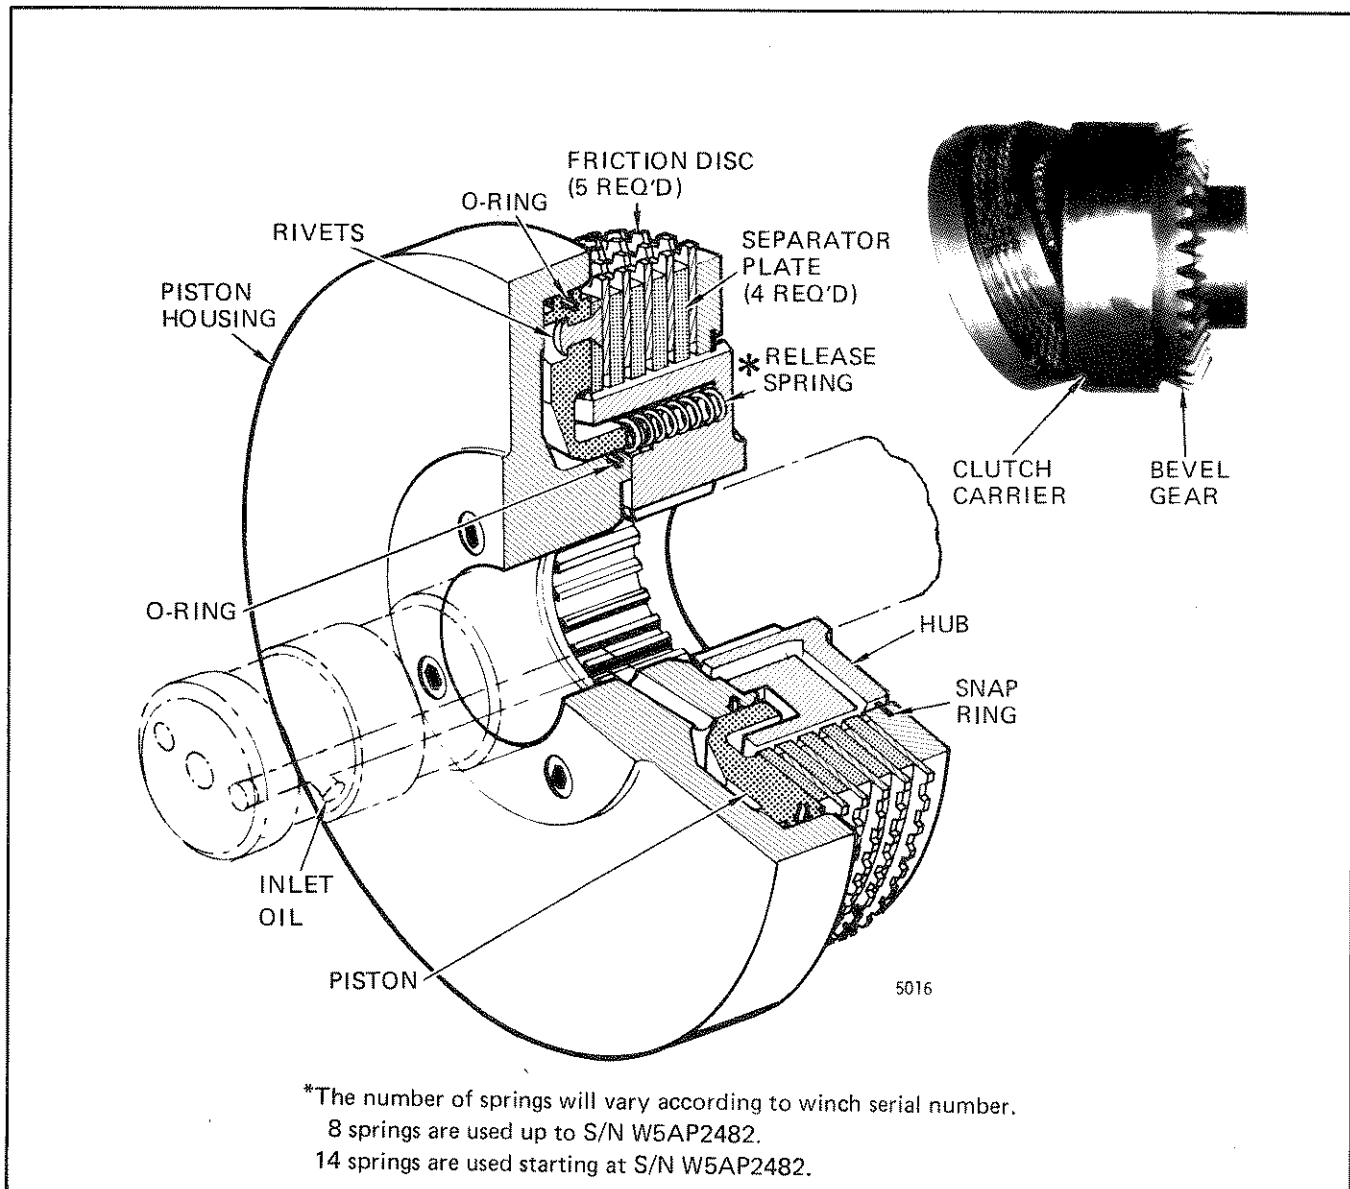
OIL CLUTCH ASSEMBLY
